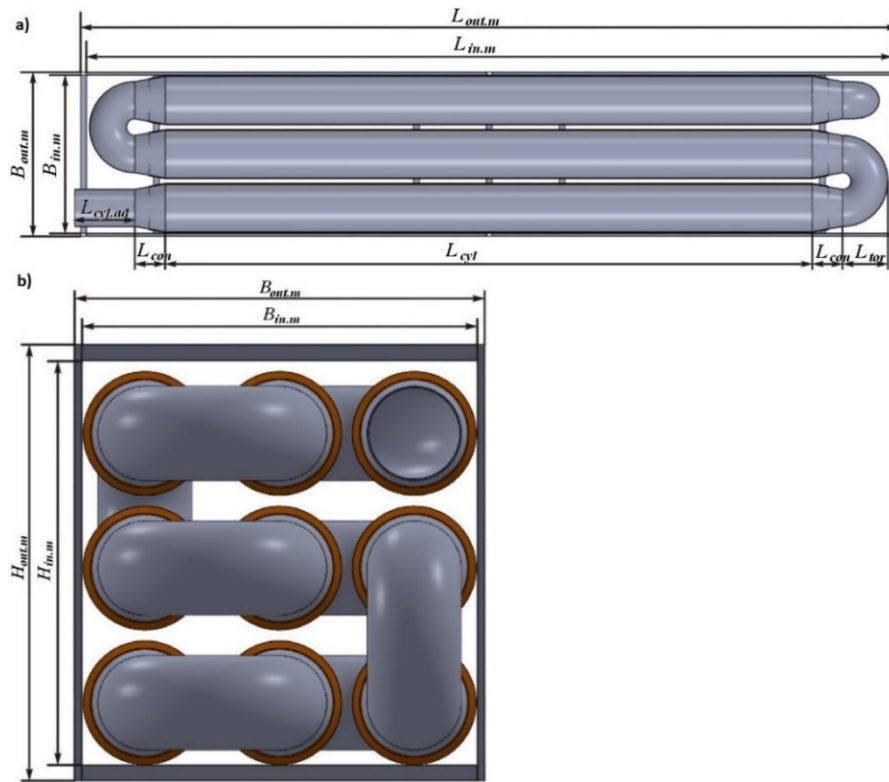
Module sketch: a) - top view of the intersection of the first layer of the coil, b) - right-side view
